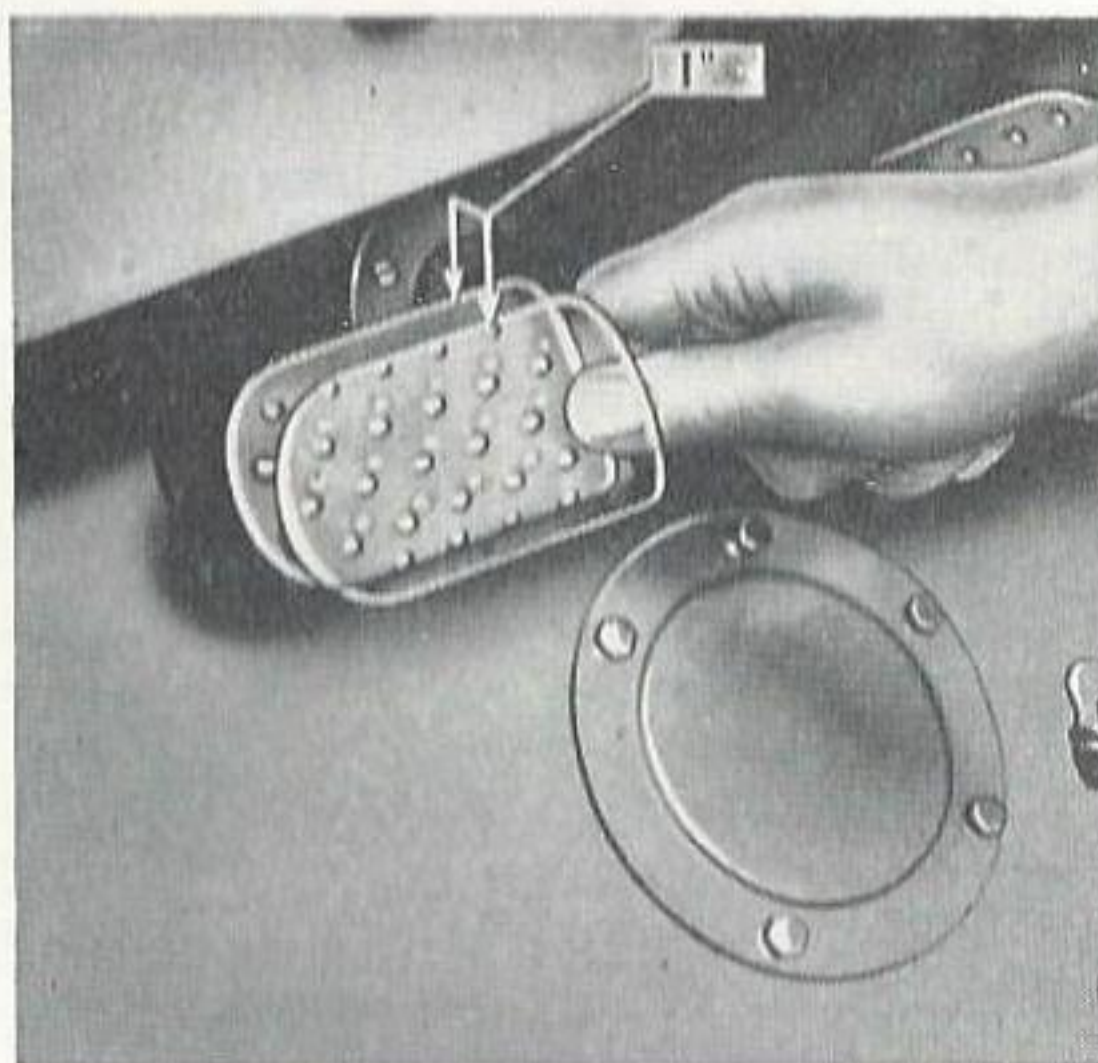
CLUTCH PEDAL ADJUSTMENT
